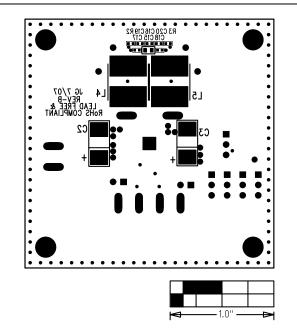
MAX9713 EV Kit Component Placement Guide— Solder Side
